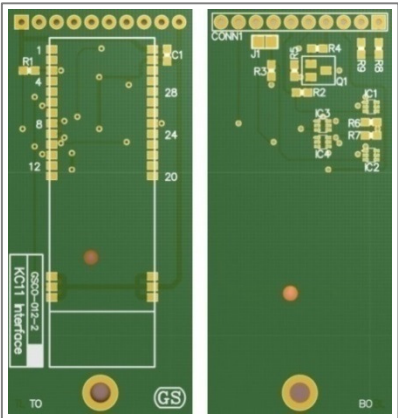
KC-11 Bluetooth Interface Board Layout
